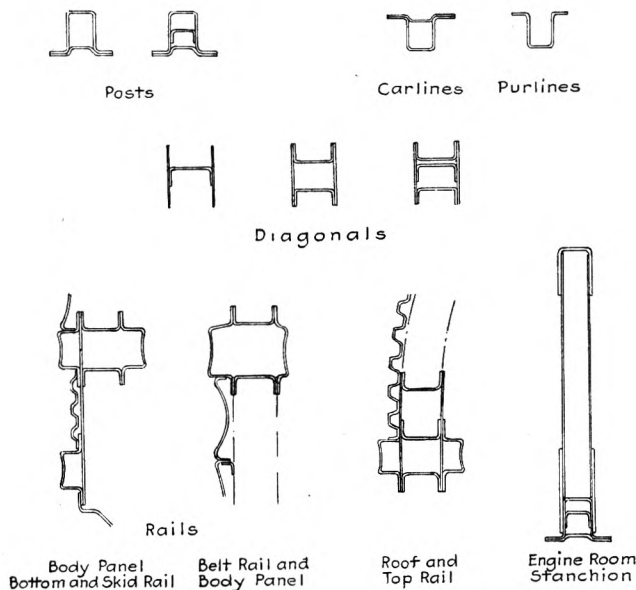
DETAILS OF STAINLESS-STEEL SECTIONS
